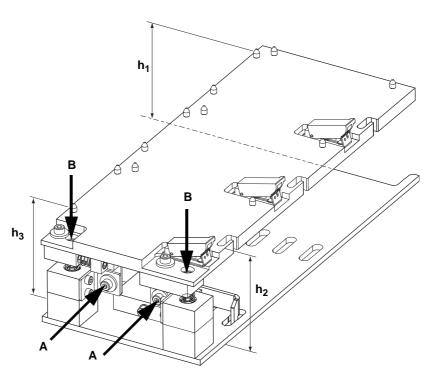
Mechanical prealignment of Te-PS carrier
